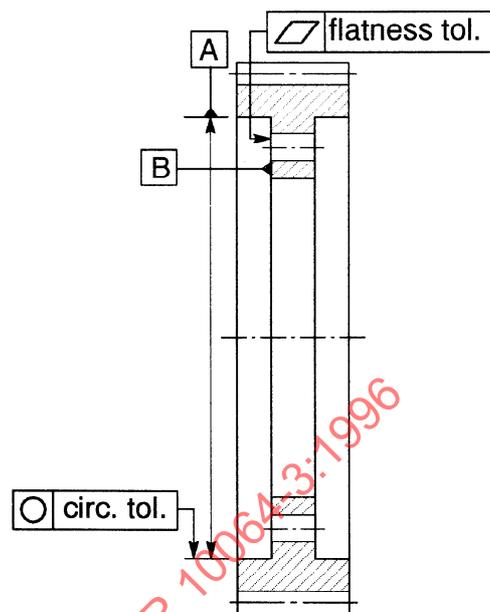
Datum axis defined by one cylindrical surface and one end-face
